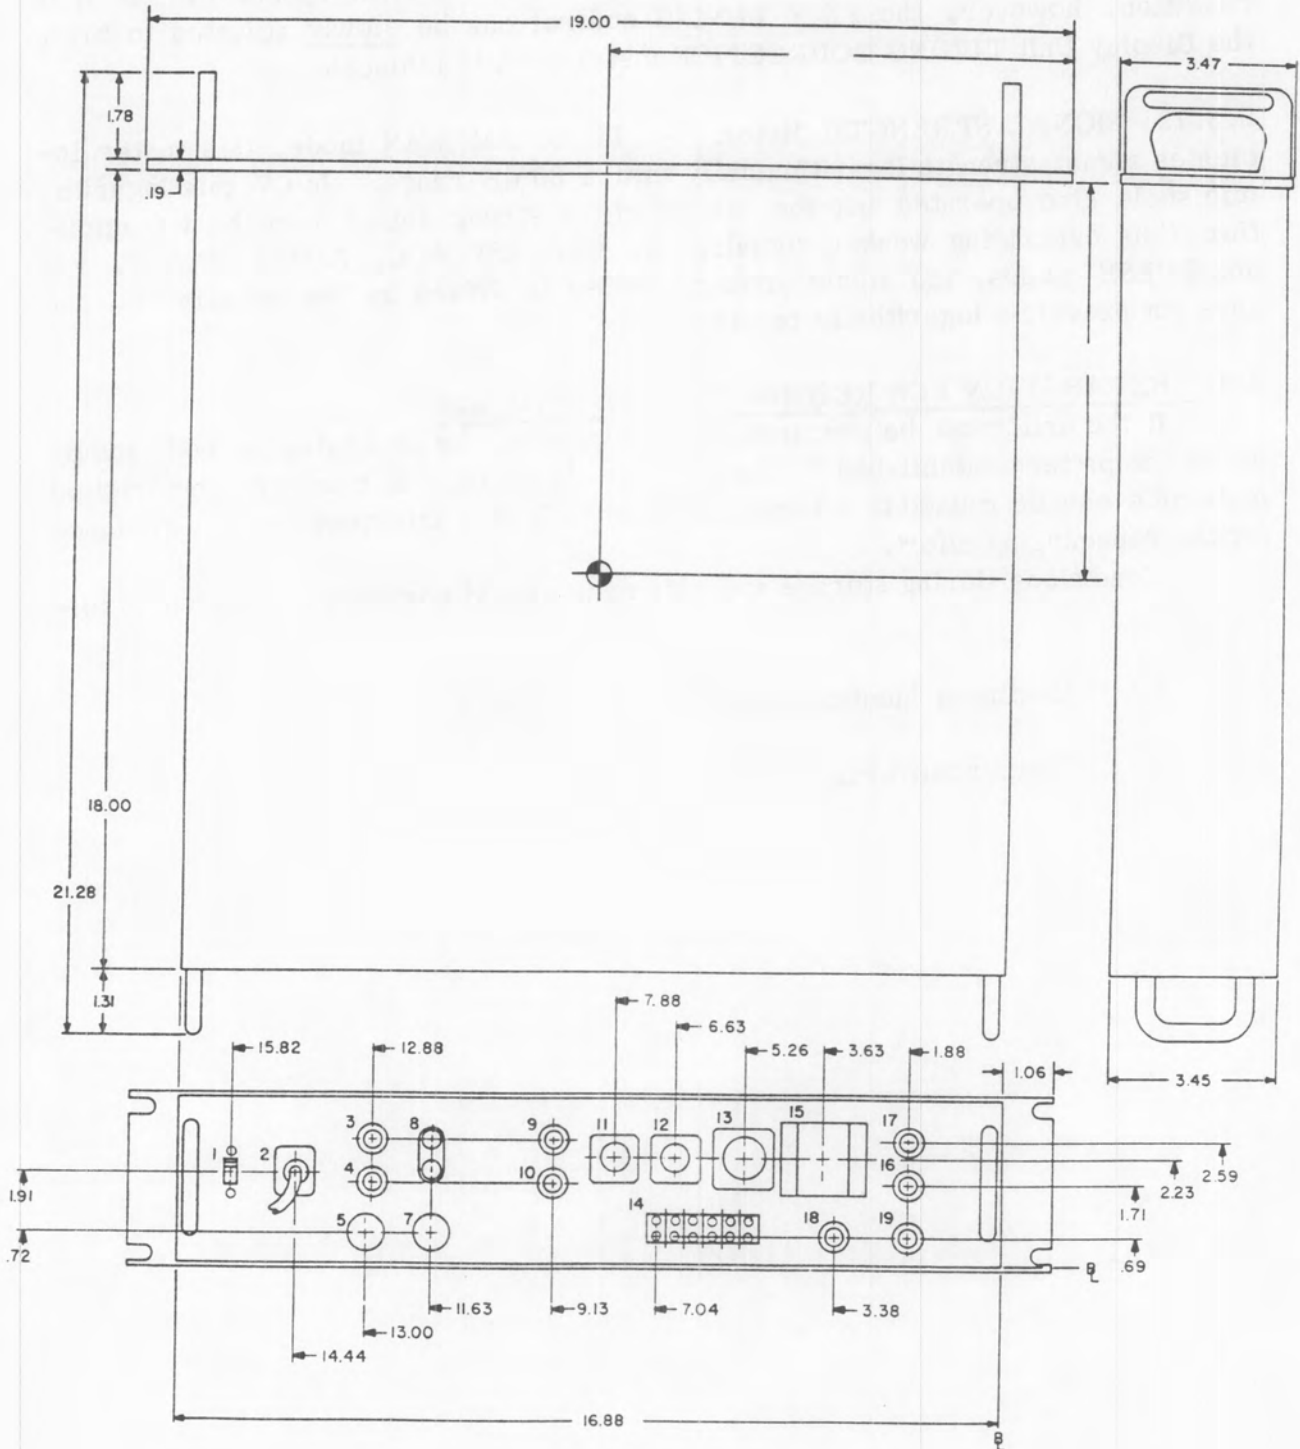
WJ-9026/RU Receiver, Critical Dimensions
